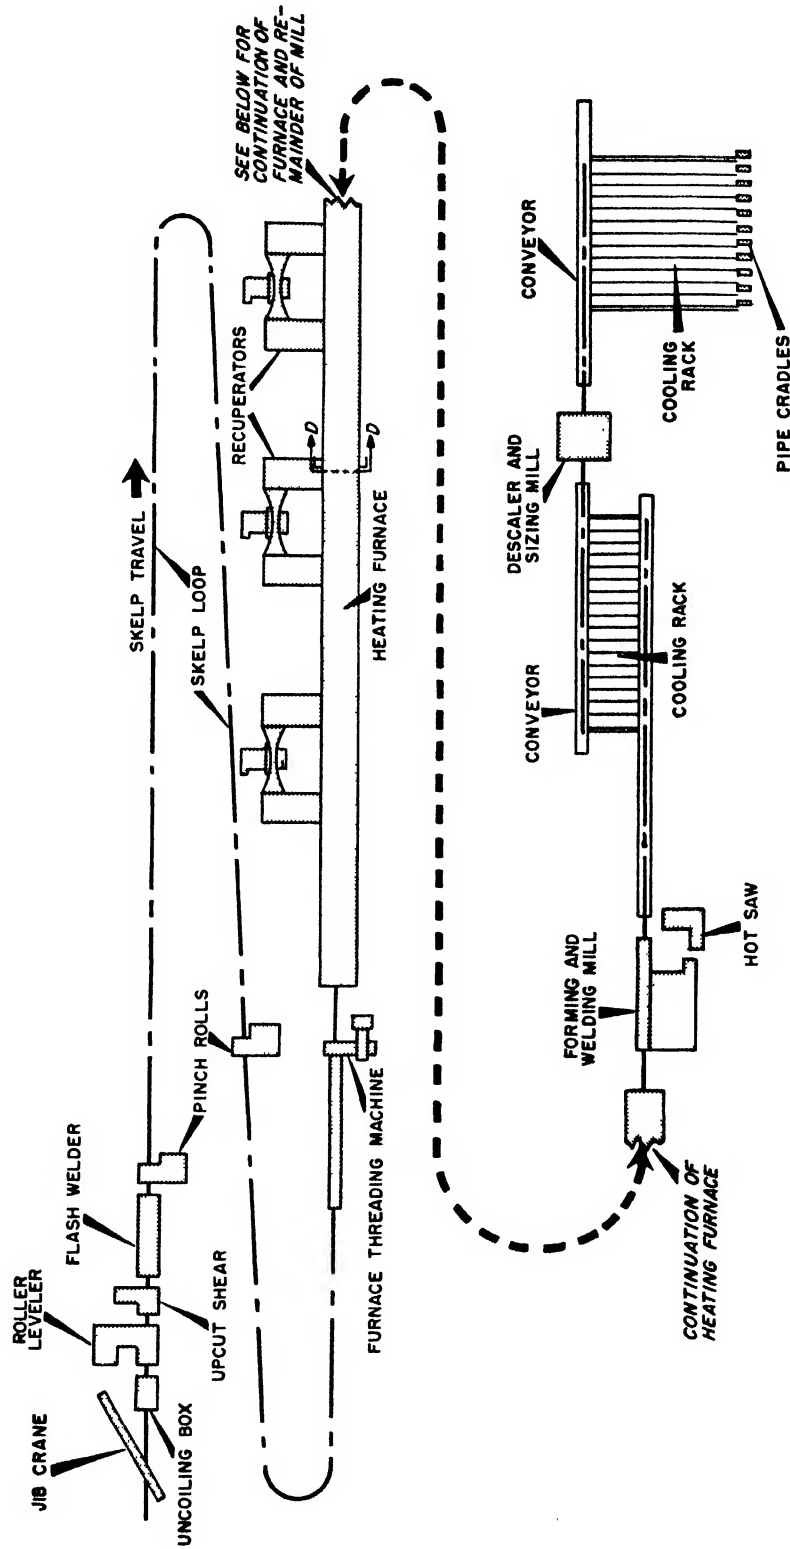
Schematic plan of the layout of a typical continuous butt-weld pipe mill. Details of the uncoiling box are shown schematically in Figure 41-8. Figure 41-9 illustrates diagrammatically the steps performed in the operation of the flash welder. The furnace threading machine is shown schematically in Figure 41-10. Section D-D of the heating furnace is given in Figure 41-11. Operation of various parts of the forming and welding mill is explained in Figure 41-12.
